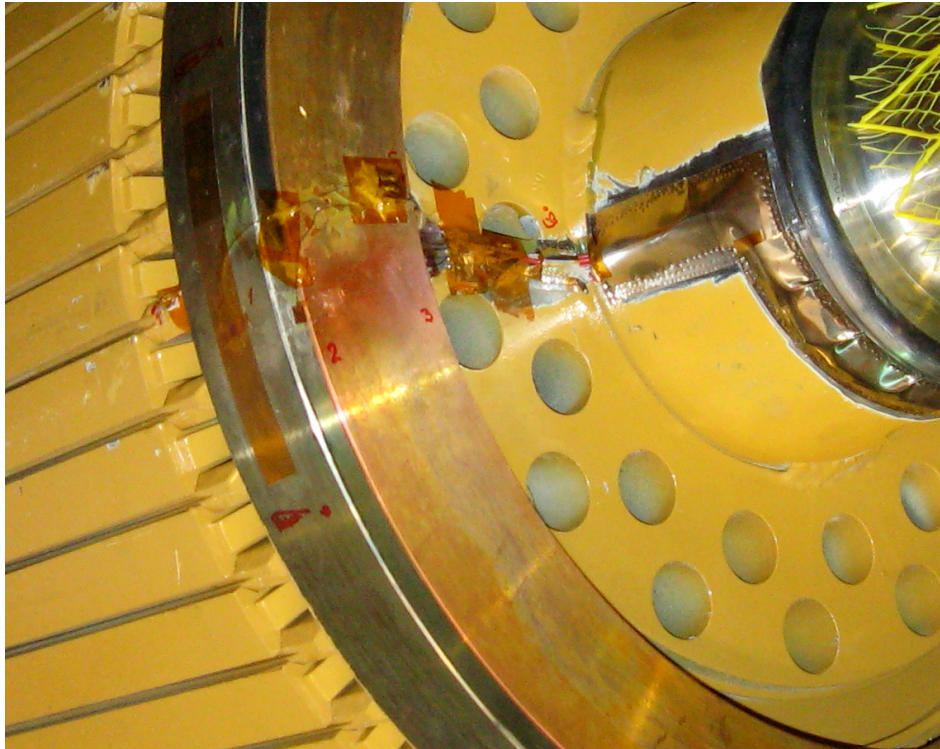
Installation of strain gauges on the shrink ring and short circuit-ring motor
